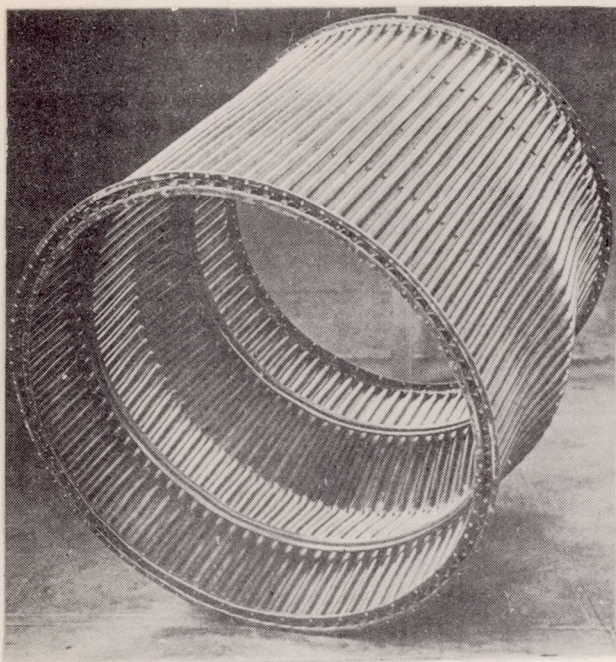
Failure of cylinder 1.      Figure 8.- Backplate of testing jig.
